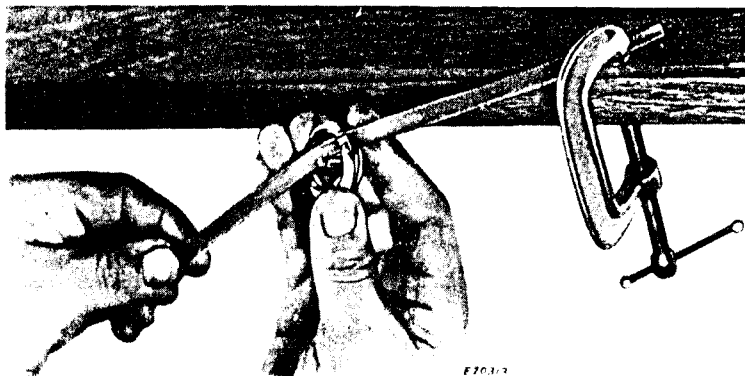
Stringing Needle Guard of Bobbin Case Holder
